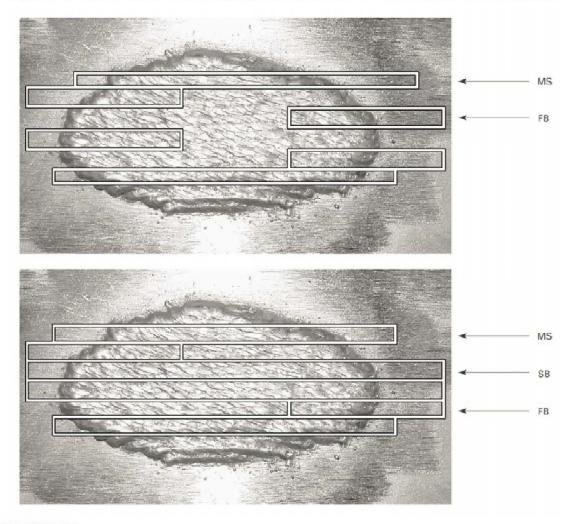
Test Sample Locations for In-Service Weld Metal Buildup Welding Procedure Qualification
